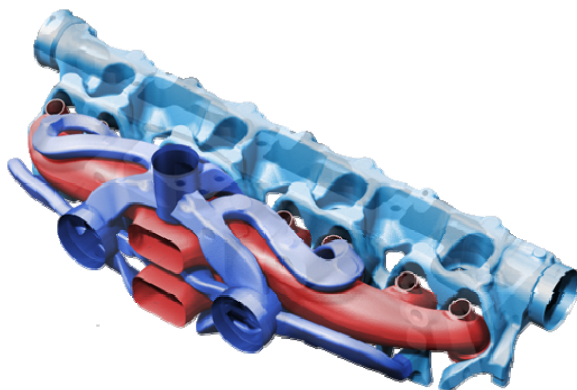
1.8l EA888 Gen.3 – Cylinder head with integrated exhaust manifold
